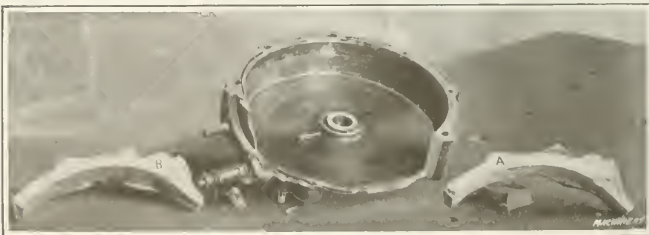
Aluminum Crank-case, Defective Part need for Pattern and New Part cast from Pattern
